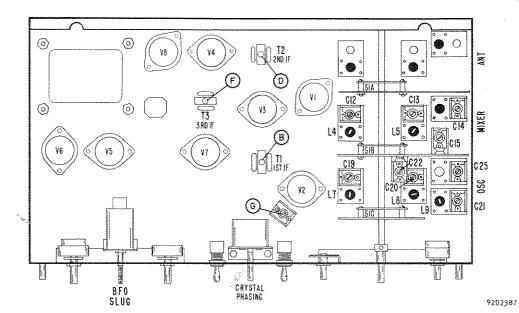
Bottom View of Chassis Showing Tube Locations and Alignment Adjustments
